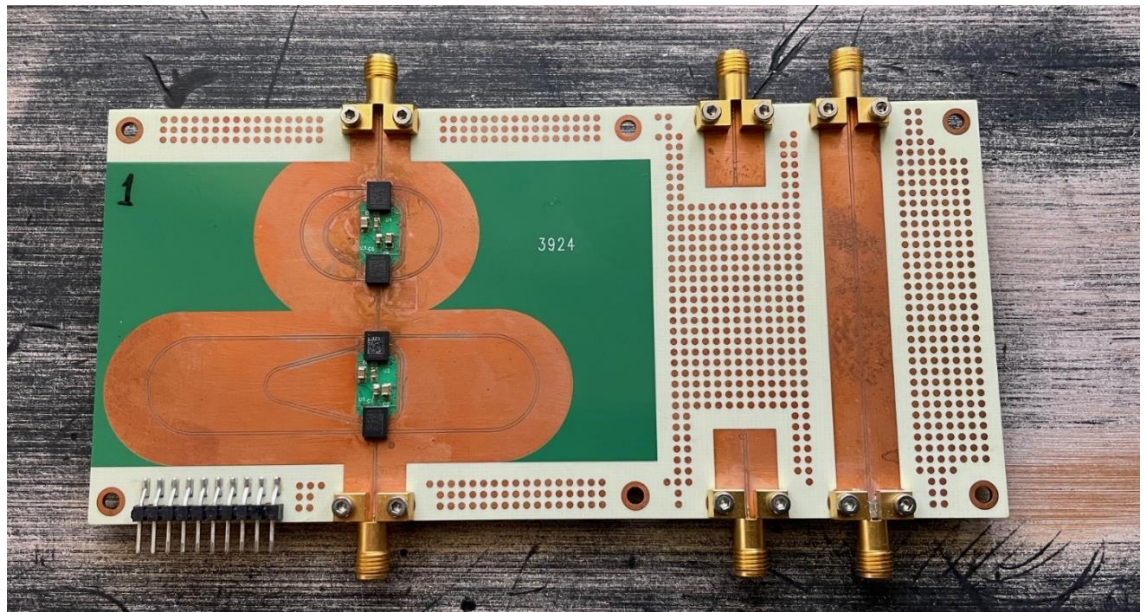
Finished PCB – Top Side, showing TDU and calibration tracks.
